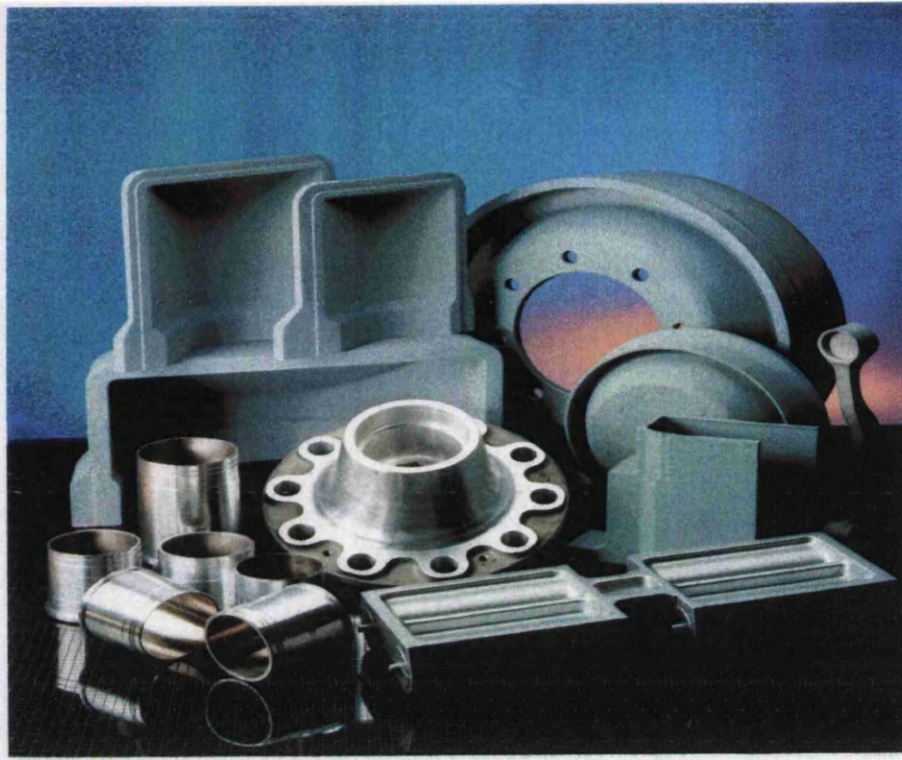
Example components obtained by the Squeeze Forming (from GKN)
